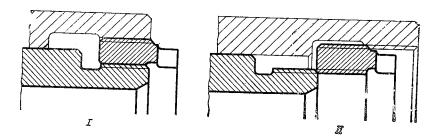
Hub fixed on shaft with nut having internal and external threads of opposite hands
